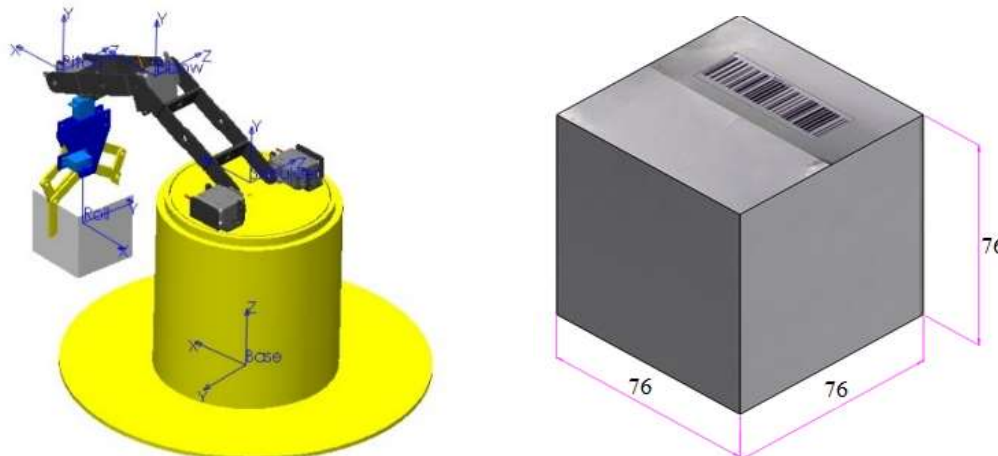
DOFs of the Manipulator & Dimensions of Workpiece
